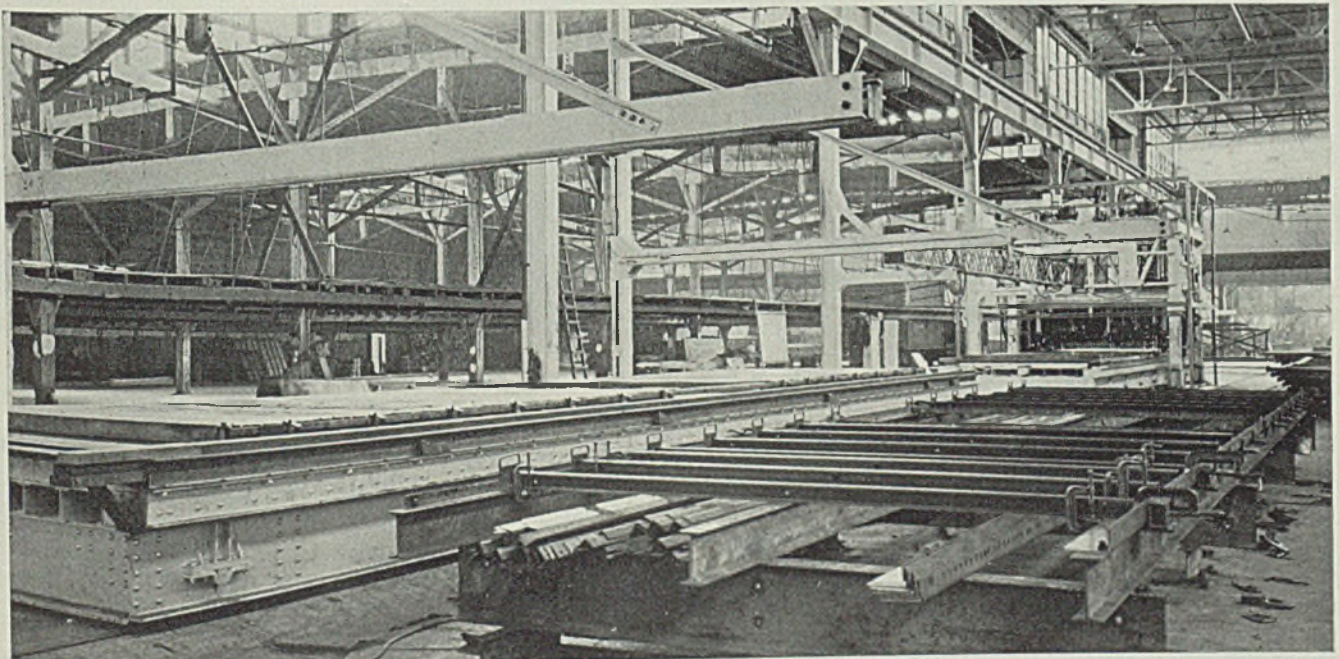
This shows the jig cars in the foreground with the welder in the background. A side frame jig is in the foreground and in the background are jig cars carrying the sheets clamped onto the frame ready for spot welding
